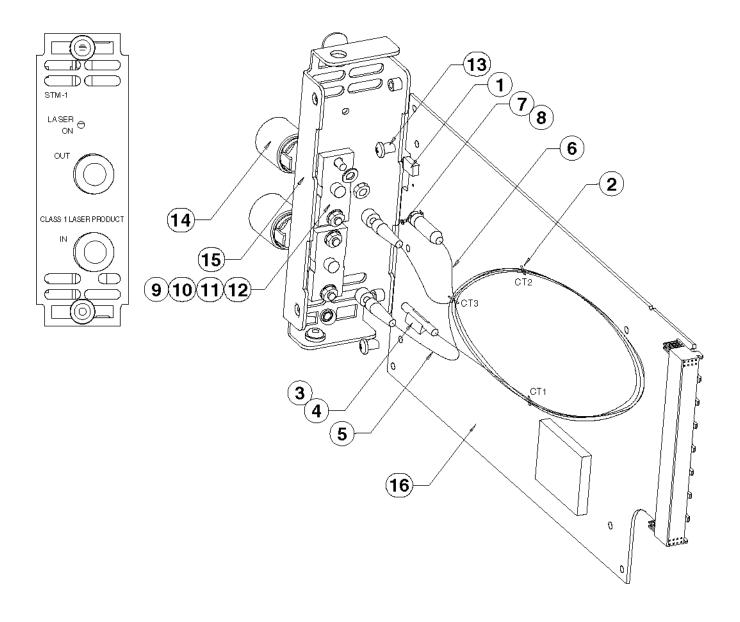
Option UH2 1310nm STM-1/4 Optics Module - Exploded View
